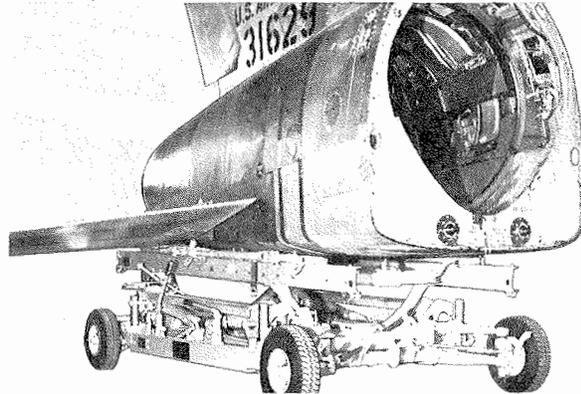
Attaching Model 4000A Trailer to Fuselage Rear Section (Sheet 2 of 3)
